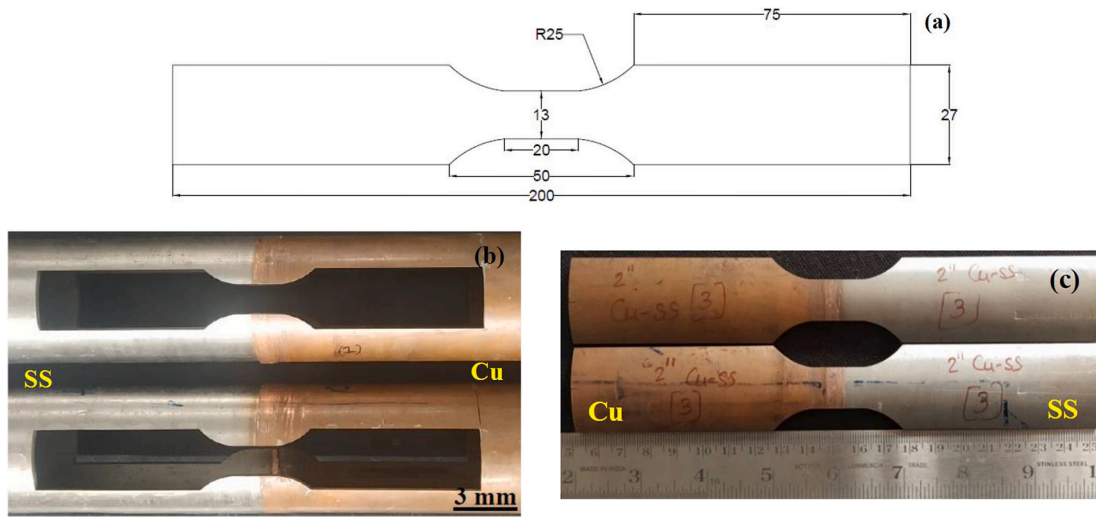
(a) Tensile specimen dimensions as per standard of ASME Section IX, (all the dimensions are in mm) (b) photographs of welded pipes after extraction of tensile specimens (c) photograph of extracted tensile specimens.
